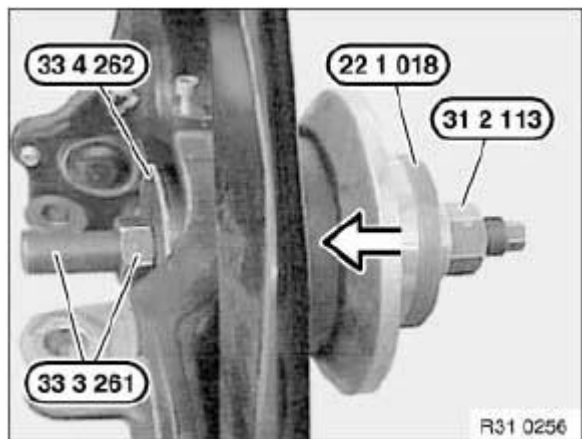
Identifying Special Tool (31 2 113), (33 4 262) And (22 1 018)
